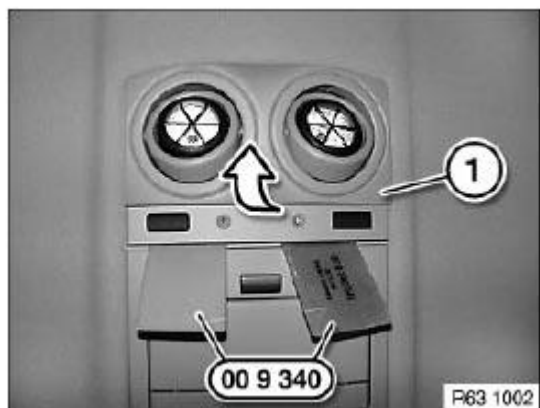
Identifying Reading Light With Special Tool (00 9 340)
